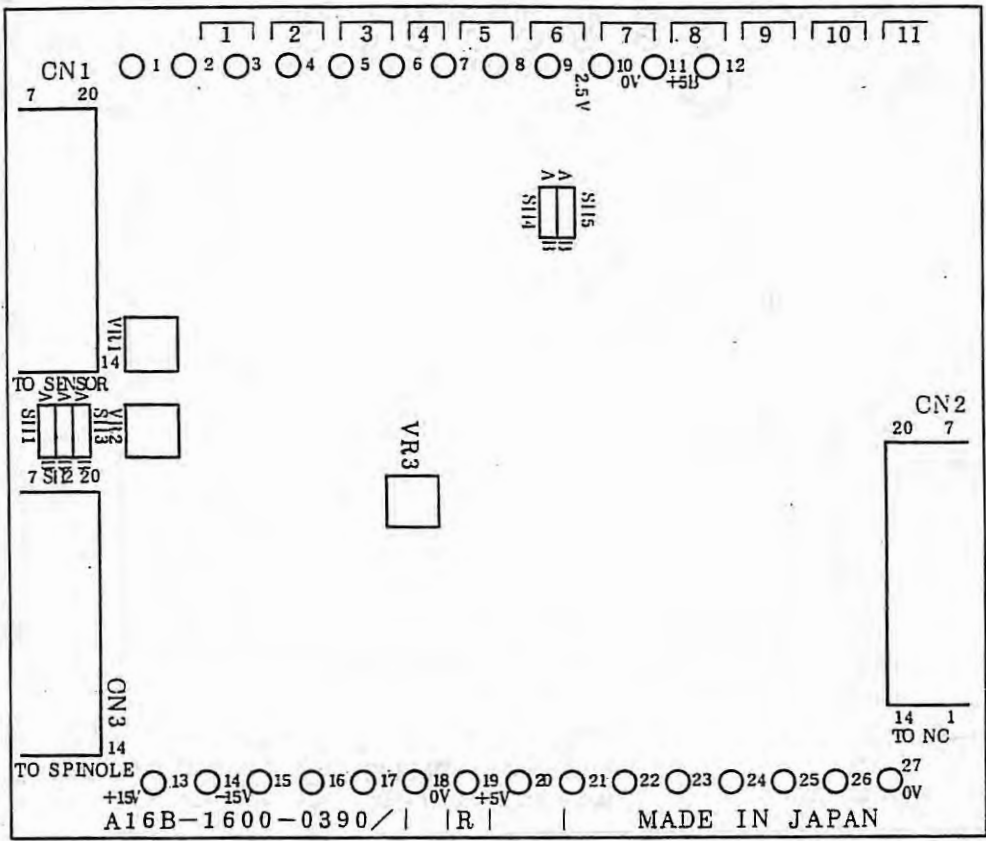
(c) Mounting positions for jumper, variable resistors and test points printed circuit board drawing No.: A16B-1600-0390
